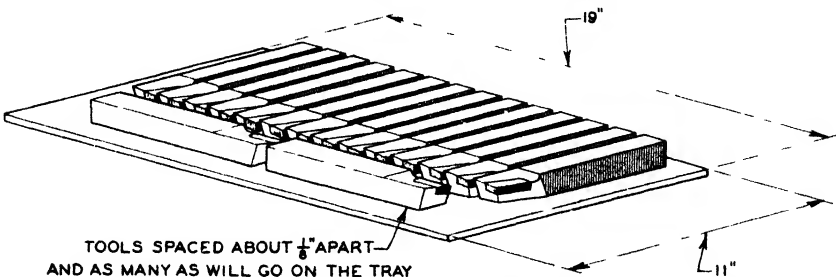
Graphite Boats (or Plates or Trays) Used to Carry the Tools through the Furnace
